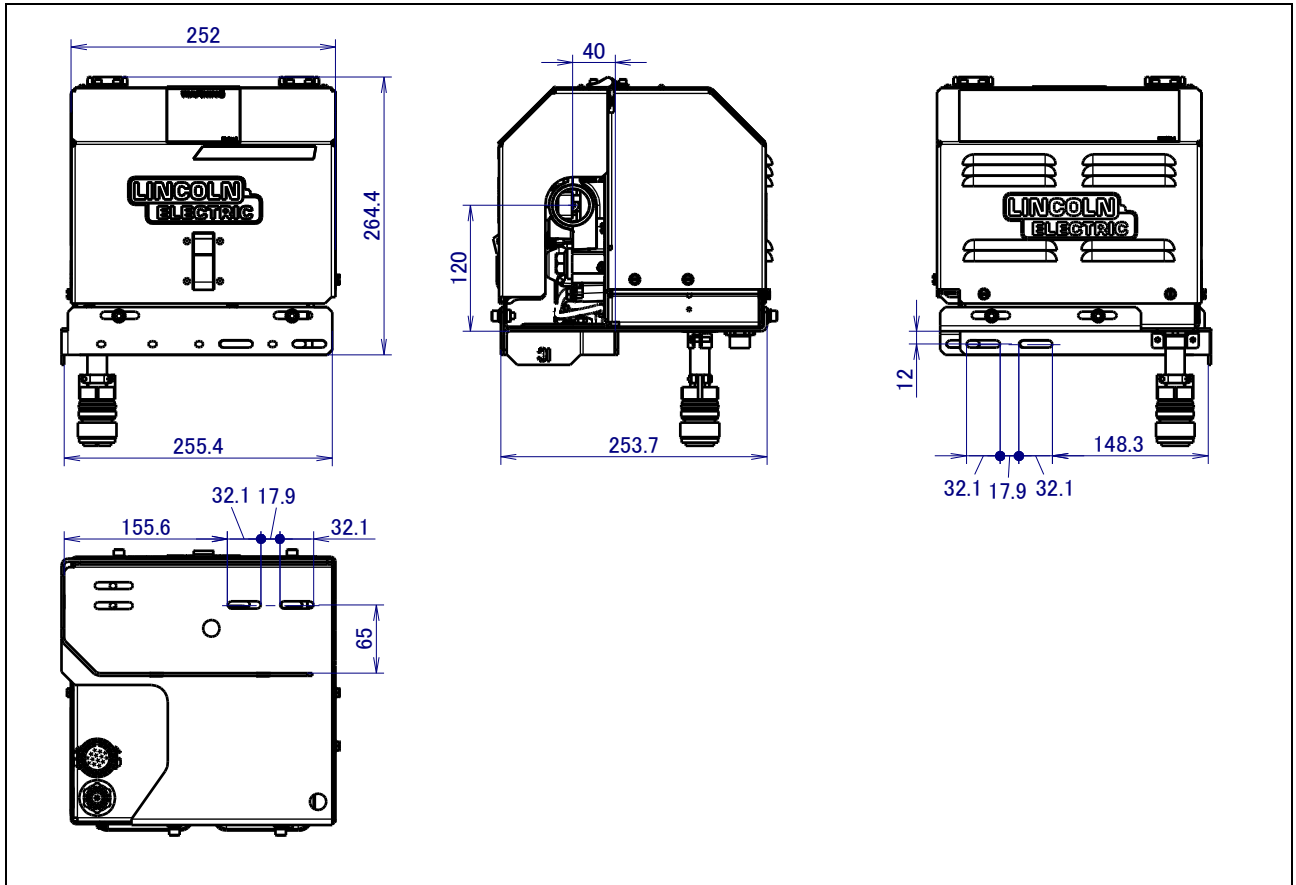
(c) Wire feeder external dimensions (A05B-1291-H204)
